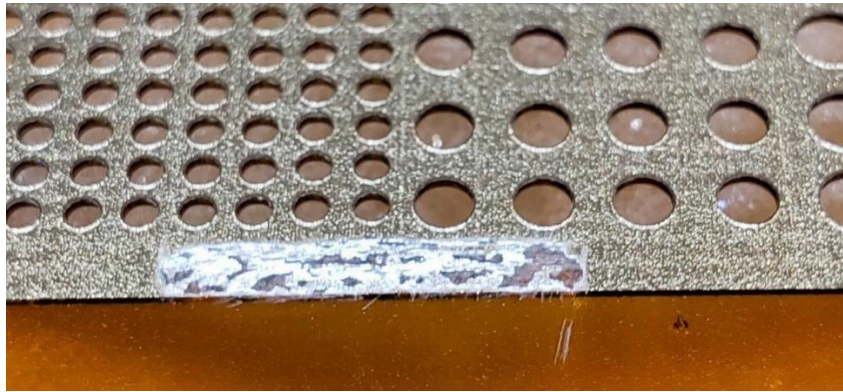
Scribe revealed the shiny silver layer underneath the mask
